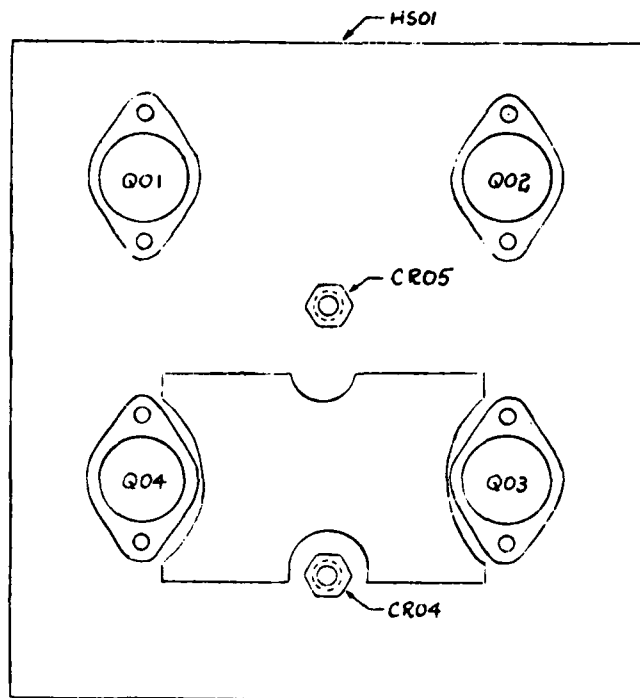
COMPONENT LAYOUT FOR POWER SUPPLY HEATSINK
